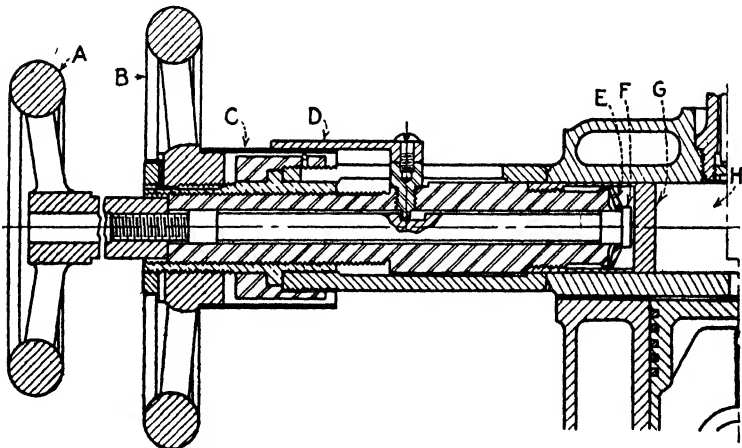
A.—SECTION THROUGH ONE-HALF OF CFR-ENGINE COMBUSTION CHAMBER.
